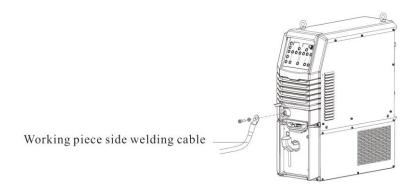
Schematic diagram of connections for working piece side welding cable
